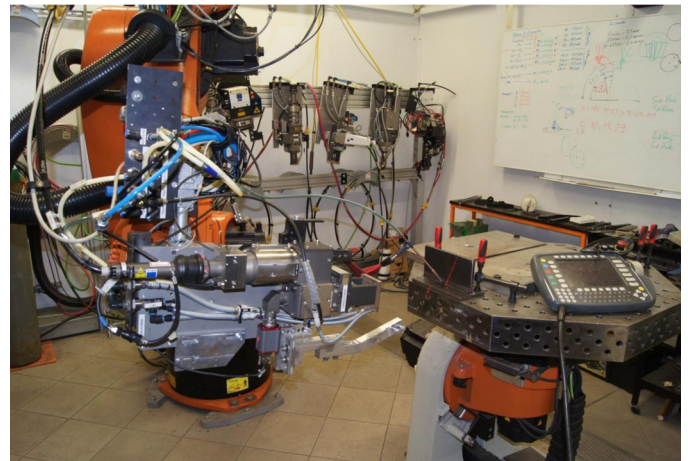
Hybrid welding station (laser beam – MAG)
